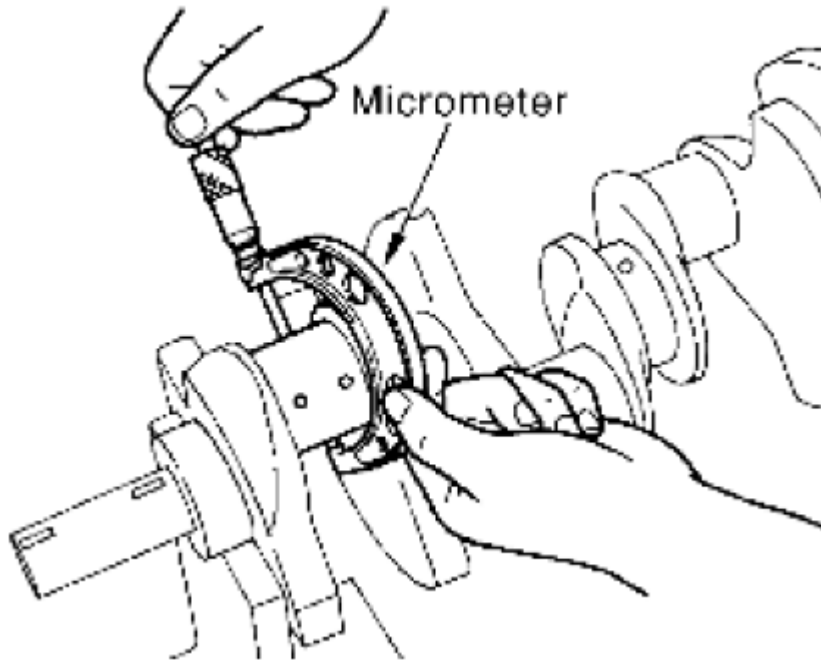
Measuring Outer Diameter Of Crankshaft Pin Journal With Micrometer
